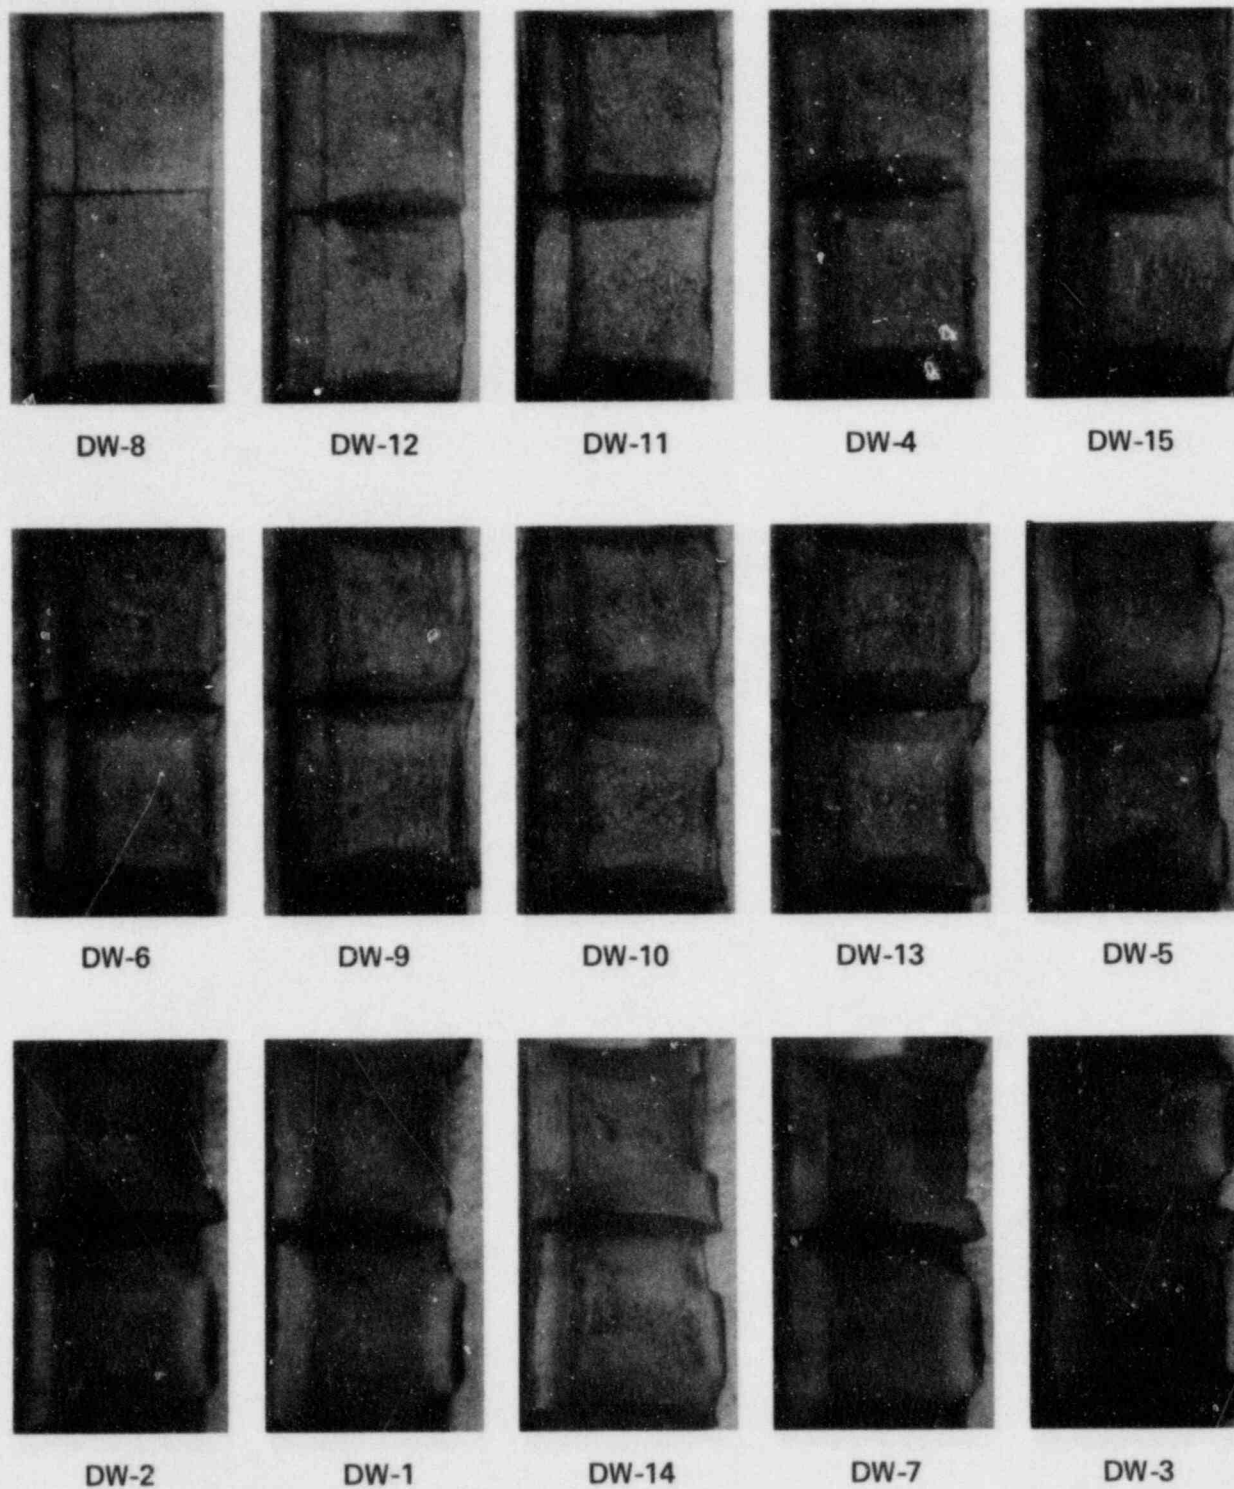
Charpy Impact Specimen Fracture Surfaces for McGuire Unit 1
